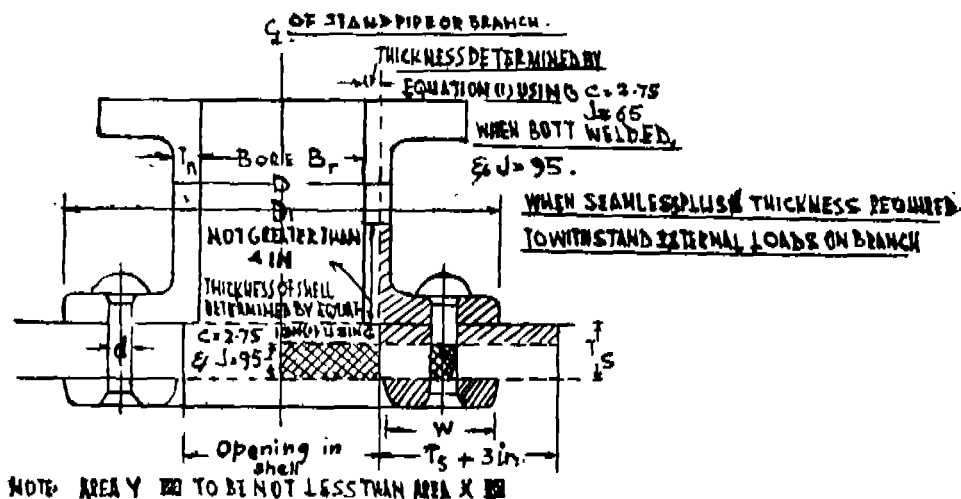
(a) COMPENSATION FOR RIVETED STANDPIPES
